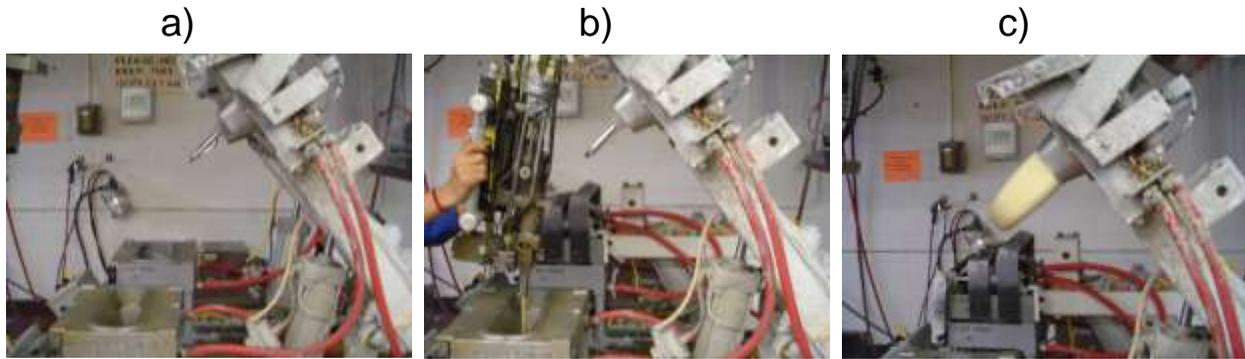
Process of forming headrest foam using an impingement mixing system. a) insertion of metal frame into tool lid b) pouring of chemicals into open mold c) demolding reacted polyurethane foam.
